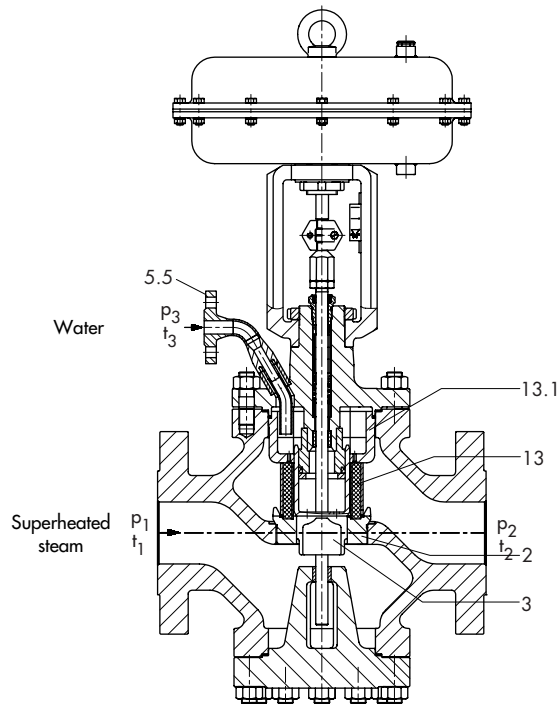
· Type 3284-1 Pneumatic Steam Converter with flanges and balanced plug
